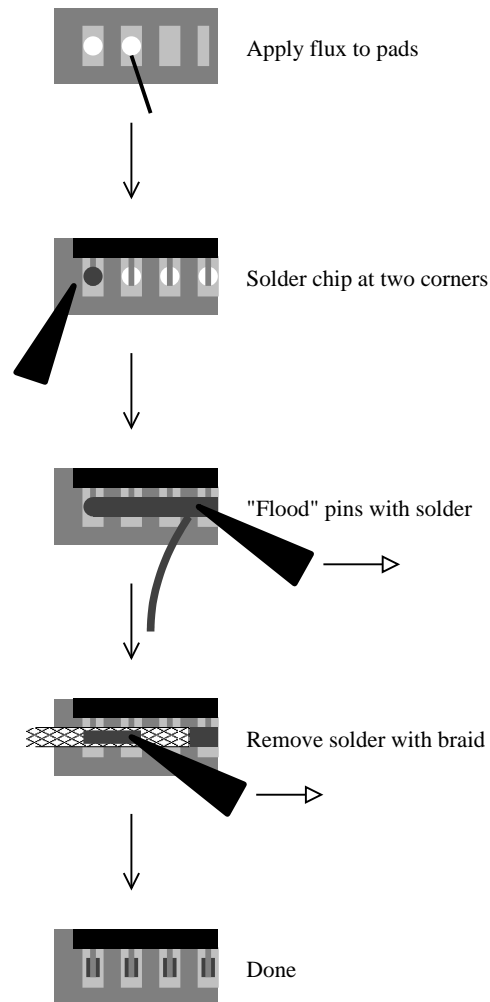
Soldering an SSOP component is surprisingly easy, given the right technique.
